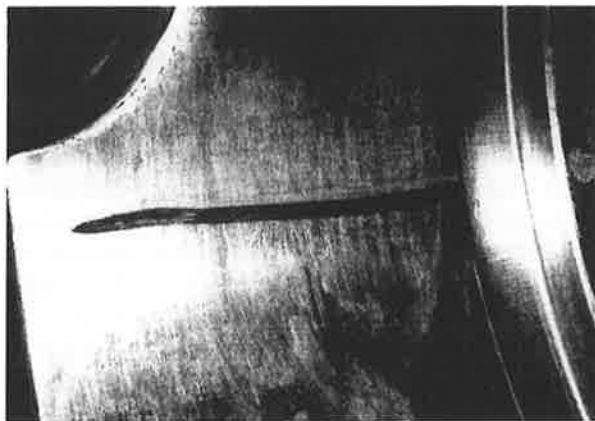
Appearance of a machined groove to test the fatigue resistance of the small end.
